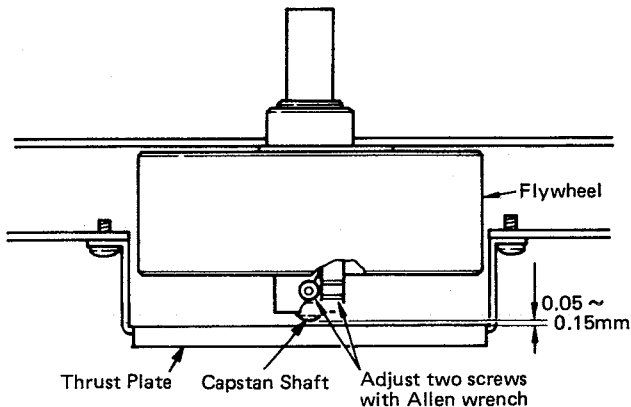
ADJUSTMENT OF CAPSTAN SHAFT AND THRUST PLATE CLEARANCE
